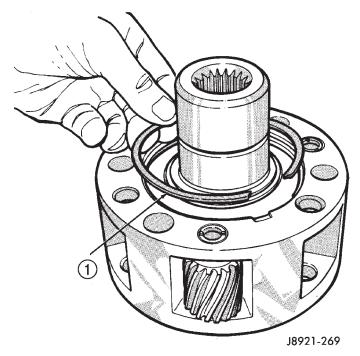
Low Range Gear Snap-Ring Removal/ Installation
